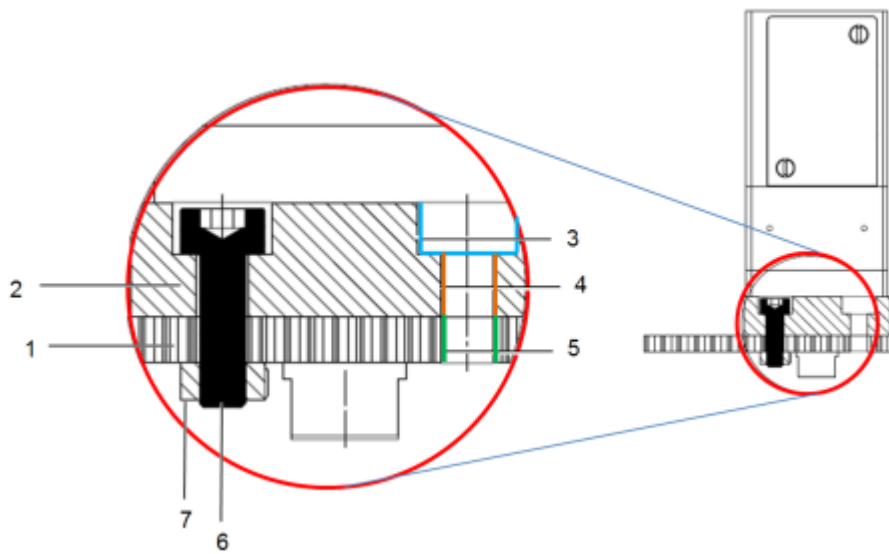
Example of alternative to recommended fastening (with through hole in the surface and nut)
